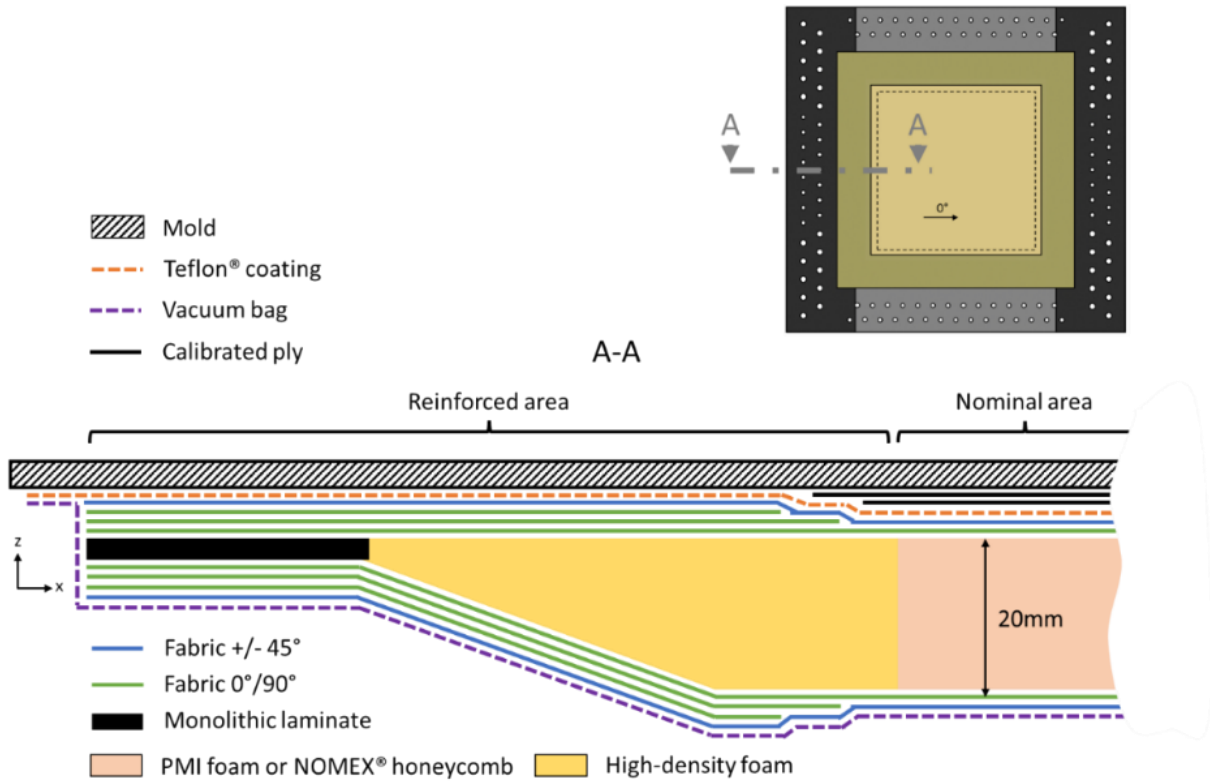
Cross-sectional drawing of specimens with the manufacturing process.
